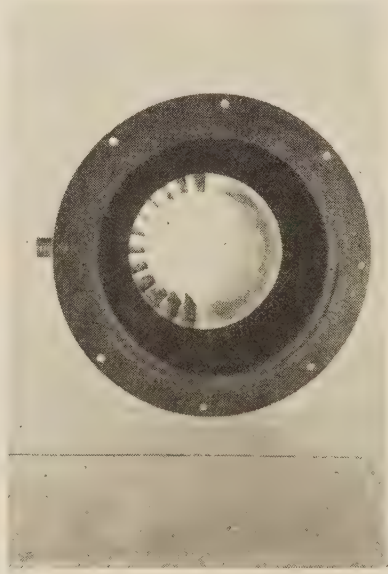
STEEL BARREL AND DIVISION STRIPS
